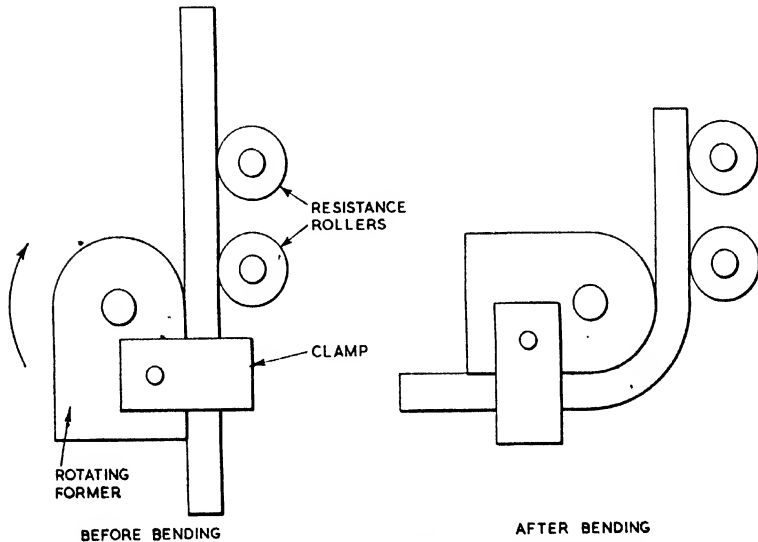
METHOD OF ROTATING FORMER OR DRAW BENDING
